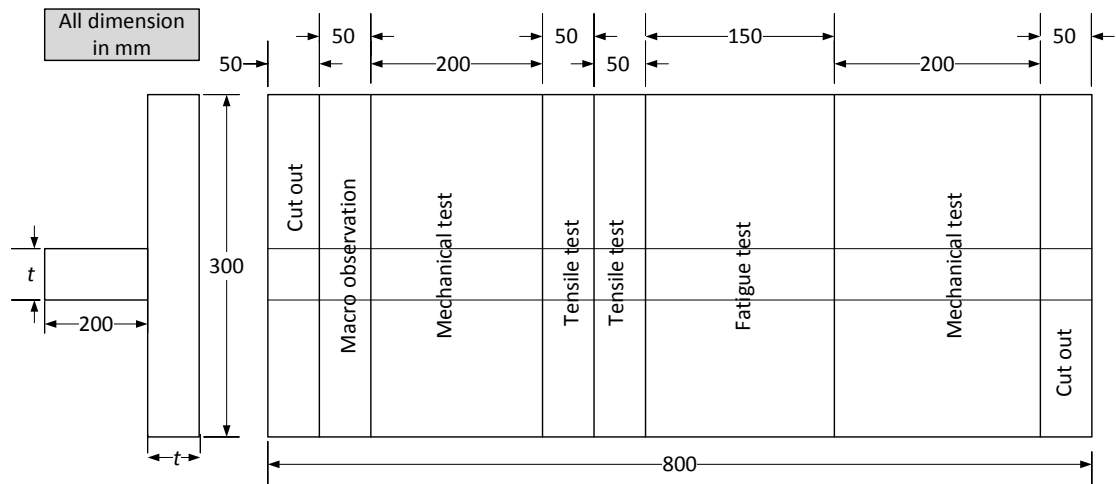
Schematic illustration of welded specimen used
